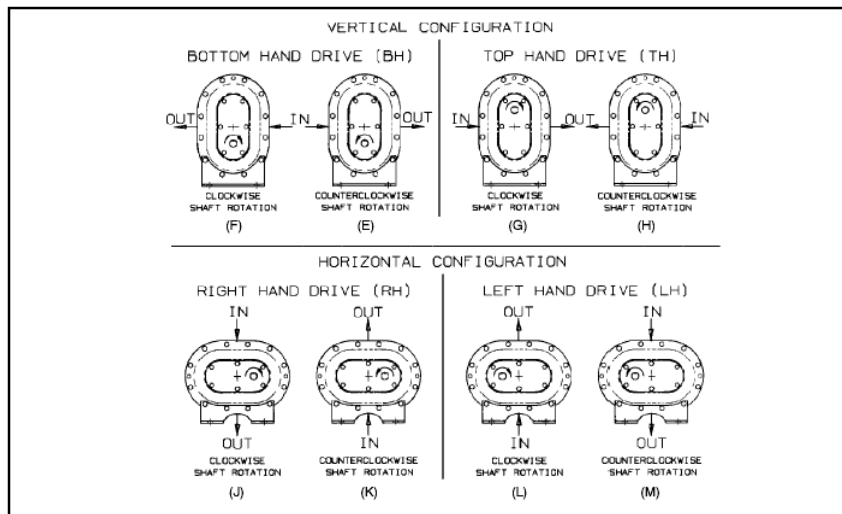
BLOWER MOUNTING CONFIGURATIONS
